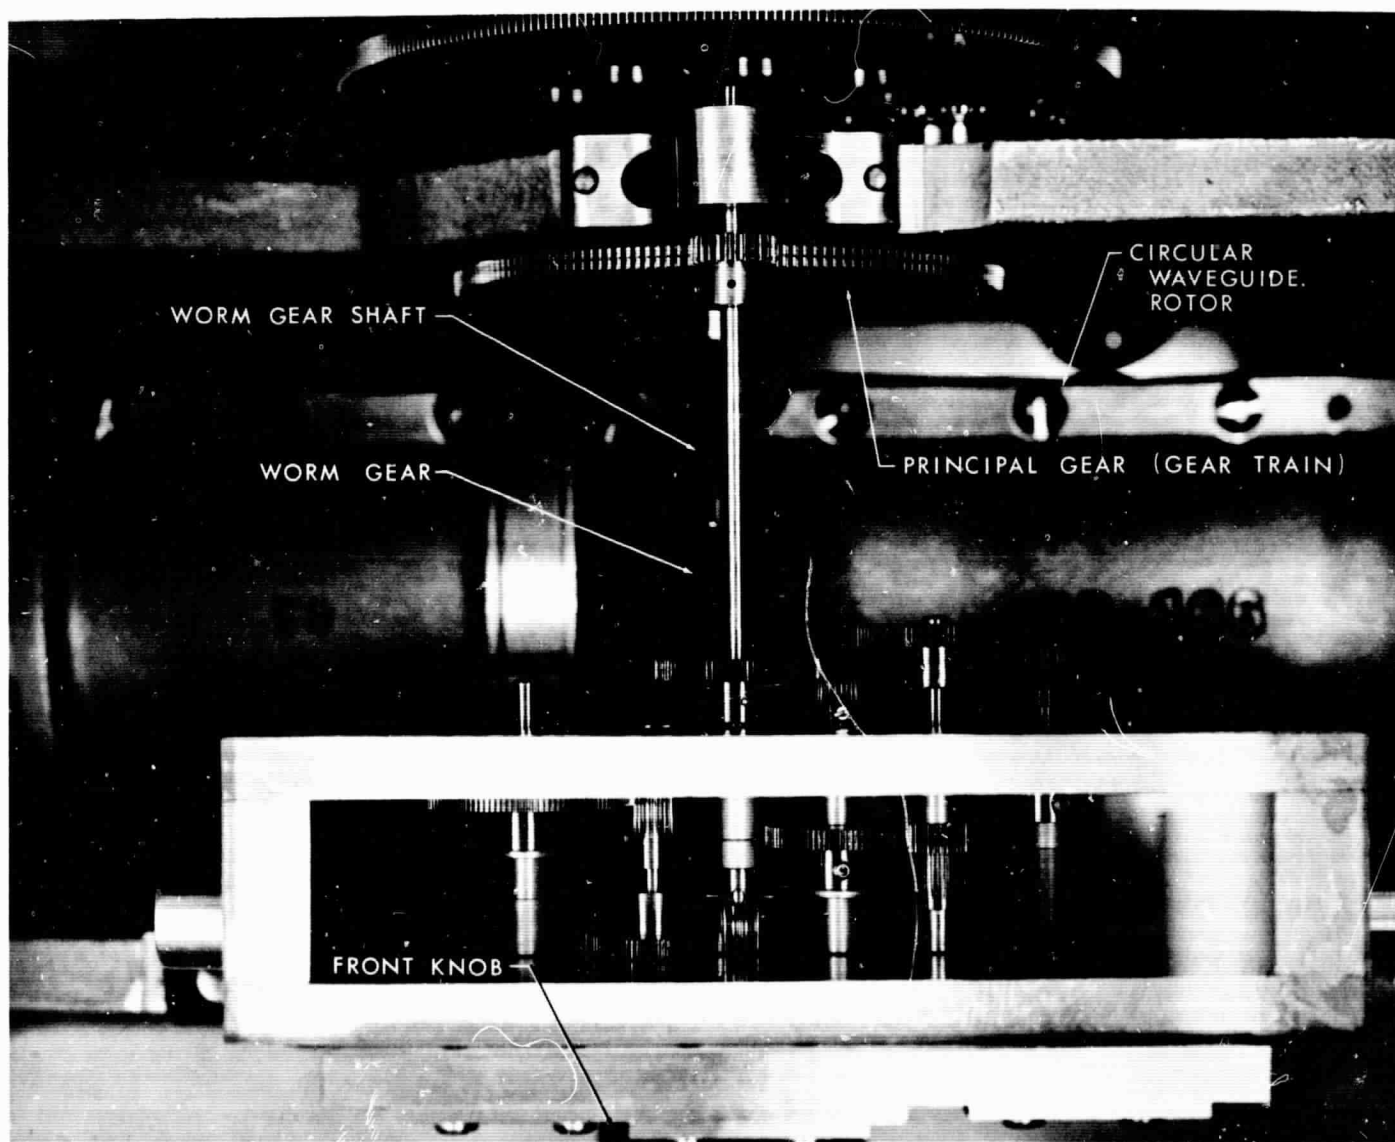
Top view of gear drive assembly (attenuator cover off)
